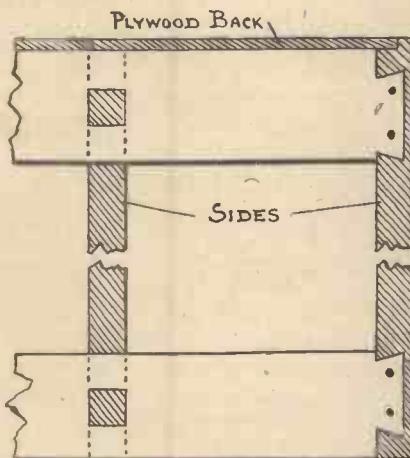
The bottom drawer rail should be doweled into the side as shown.
